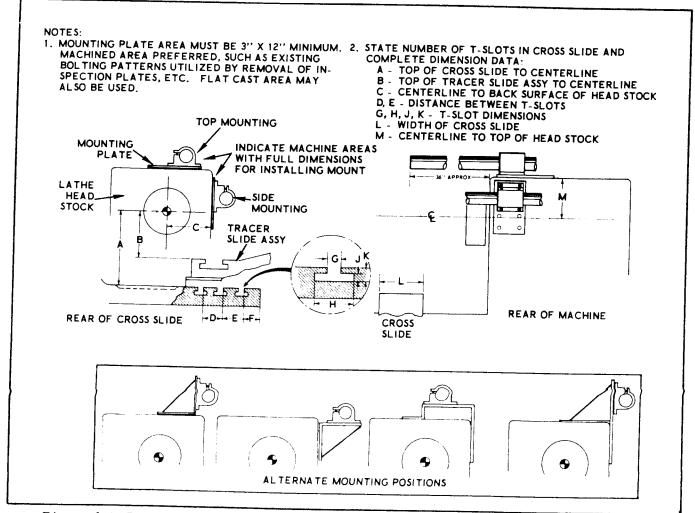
Dimensions to be Measured on a Turret Lathe for Ordering a Lathe Tracer Attachment for Turret Lathe Application
